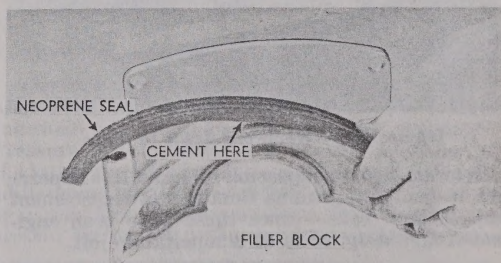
Installing Neoprene Seal in Rear Filler Block
